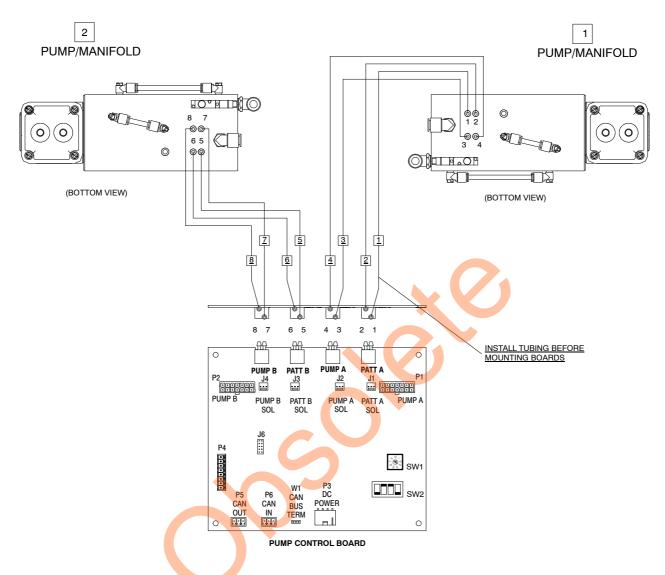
Pump Panel Pneumatic Diagram - Pump Manifolds to Circuit Board
